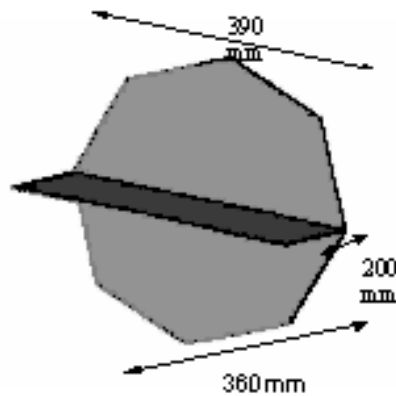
Final design of the light alloy internal panel, with dimensions marked
